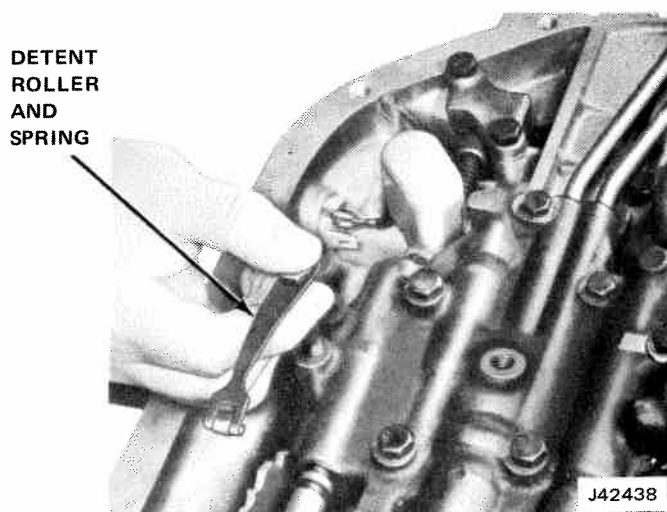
Removing or Installing Detent Roller Assembly and Spring
